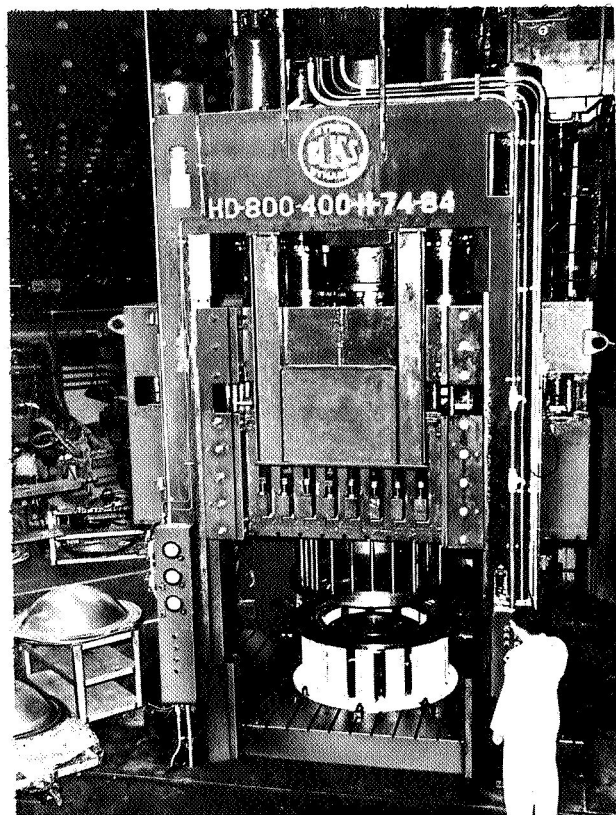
800-TON PRESS EQUIPPED WITH SPRING-LOADED DIE CUSHION USED FOR DRAWING 52-INCH-DIAMETER ALUMINUM DOMES
